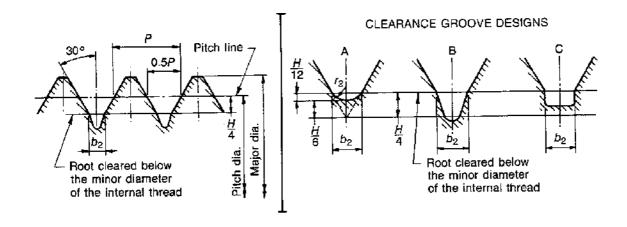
PROFILE FOR PLUG TYPE GAUGES WITH COMPLETE FLANKS
